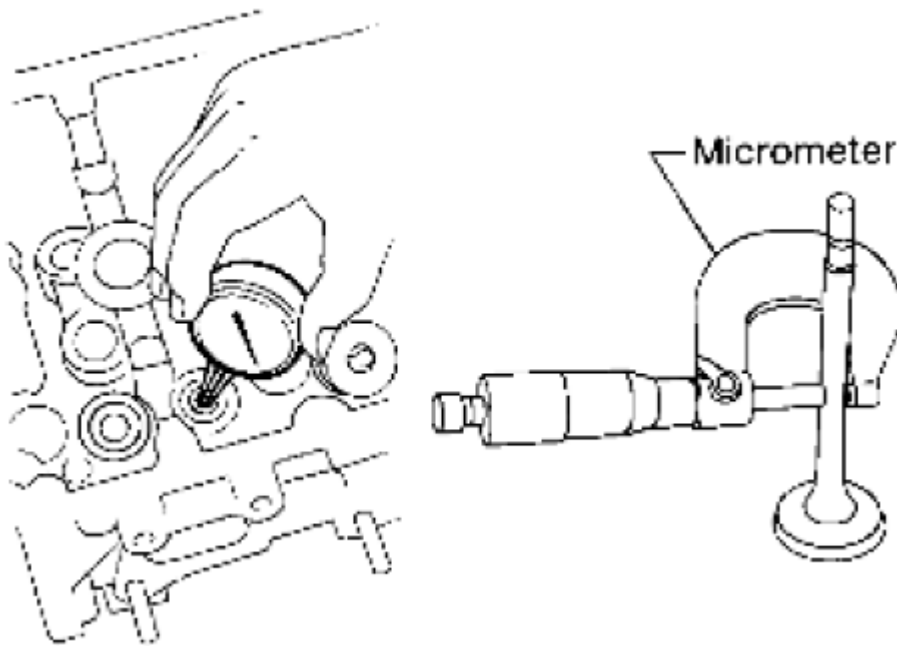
Measuring Diameter Of Valve Stem With Micrometer
